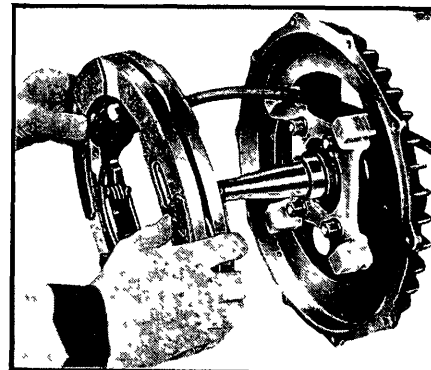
Removing brake pressure plates. Chrysler front disc brake
